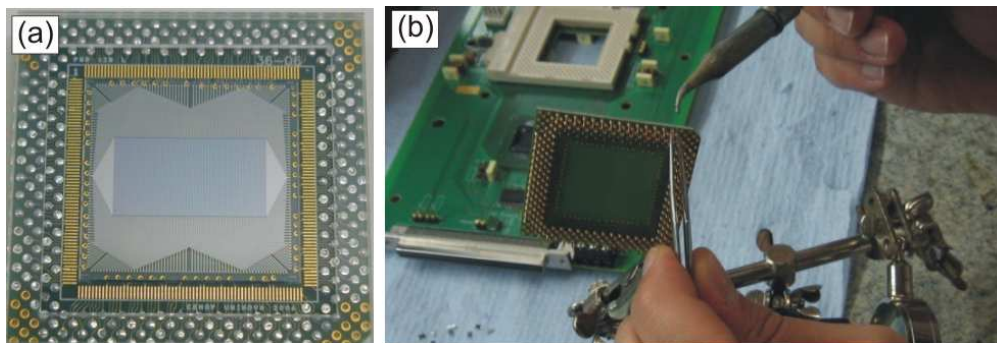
(a) Image of the 128 psd integrated array and of the (b) pcb where this will be mounted
